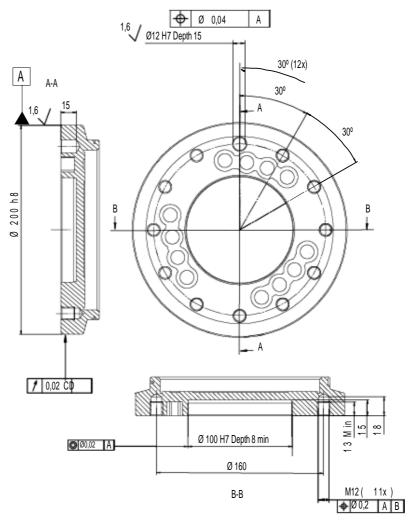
Robot tool flange ISO/DIS 9409-1:2002 (dimensions in mm).
